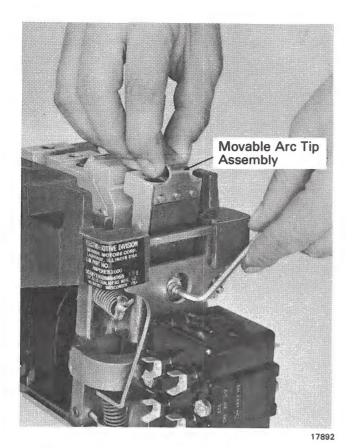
Removal Of Movable Arc Tip Assembly
